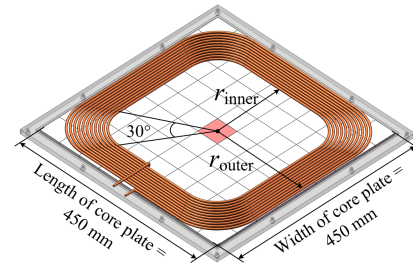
Dimensions of rectangular coil and magnetic core plate.
